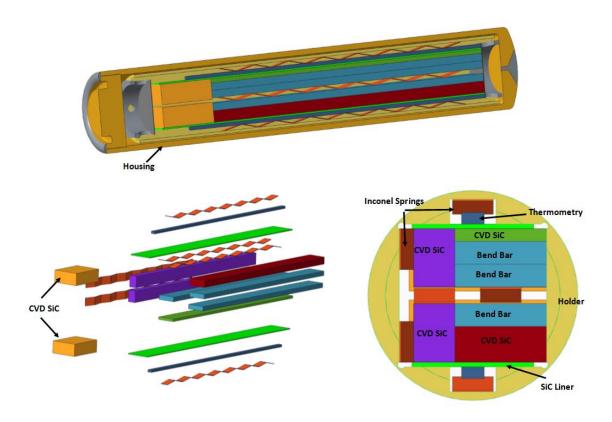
Capsule design concept for irradiating SiC matrix composite bend bars specimens.
